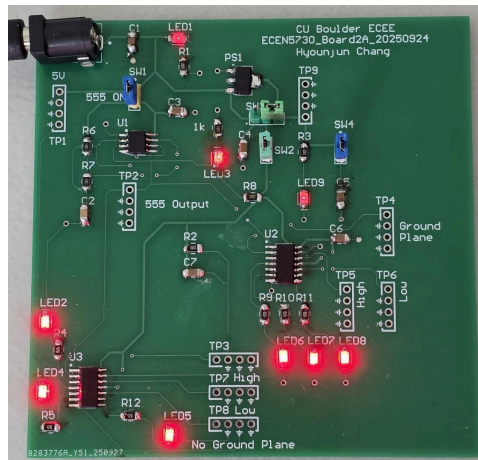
Assembled Board 2 with Indicator Lights of Hex Inverter operating at 3.3V
